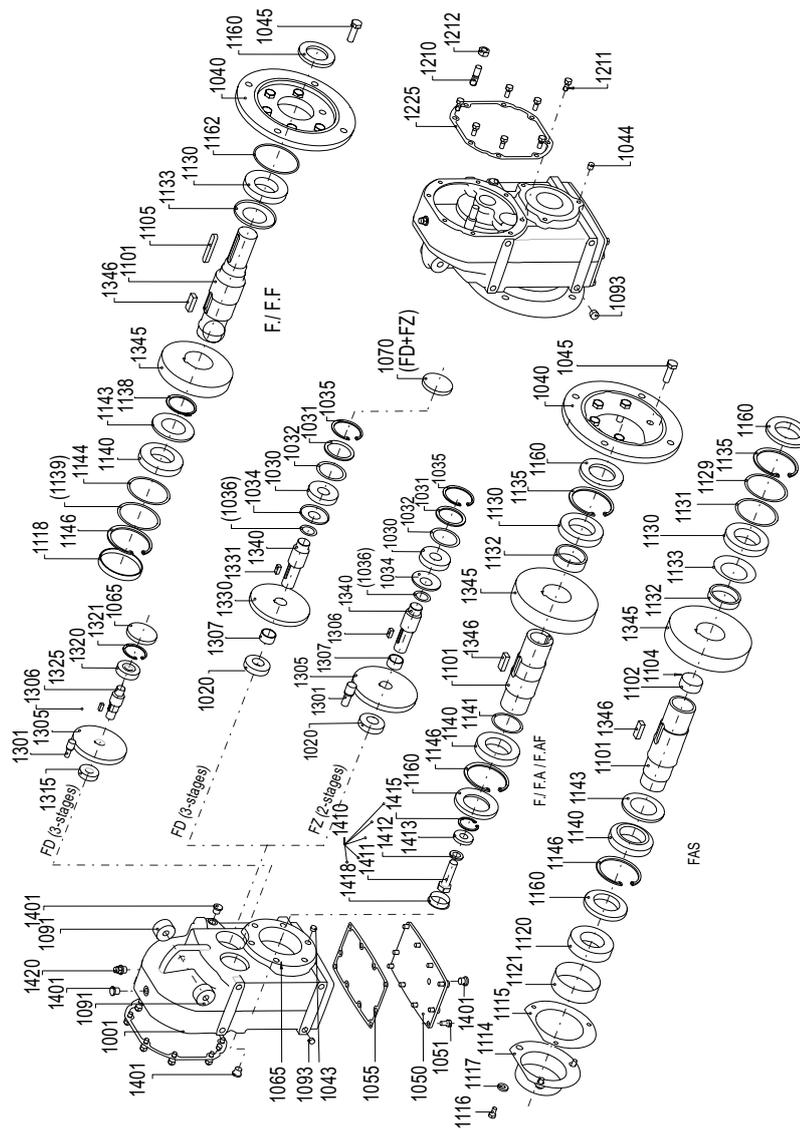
Helical gearboxes D. / Z., sizes 19 - 89
